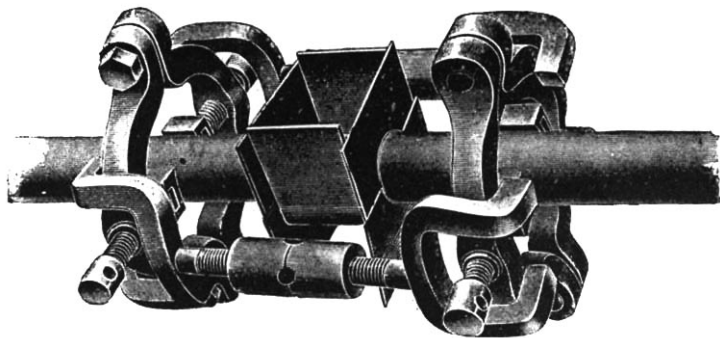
Tubes clamped together with a casing of thin iron round the junction to be welded.
